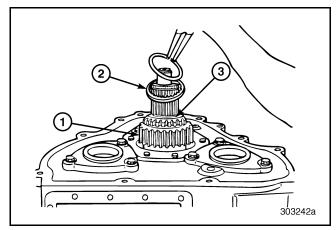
Removing Snap Ring, Thrust Washer and Lo-Split Gear (T313L/T318L Shown)
